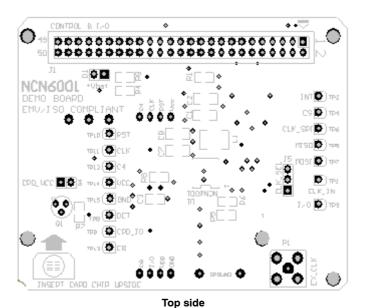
NCN6001 Demo Board Printed Circuit Board Layout
